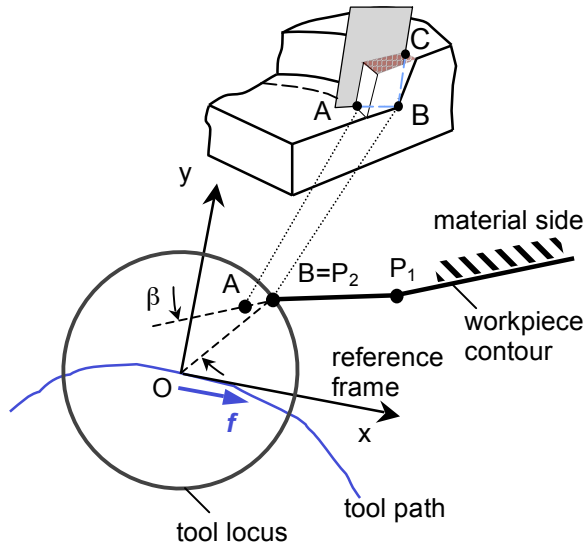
SCHEMATIC OF REFERENCE FRAME, TOOL LOCUS, TOOL PATH, CUTTING EDGES, AND CONTOUR OF THE WORKPIECE.
